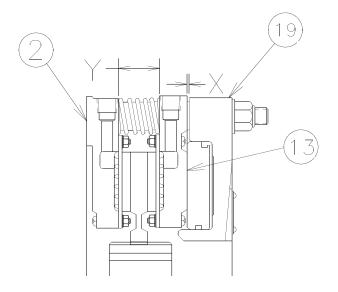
136WCB2EP - "X" & "Y" gap locations for single disc
